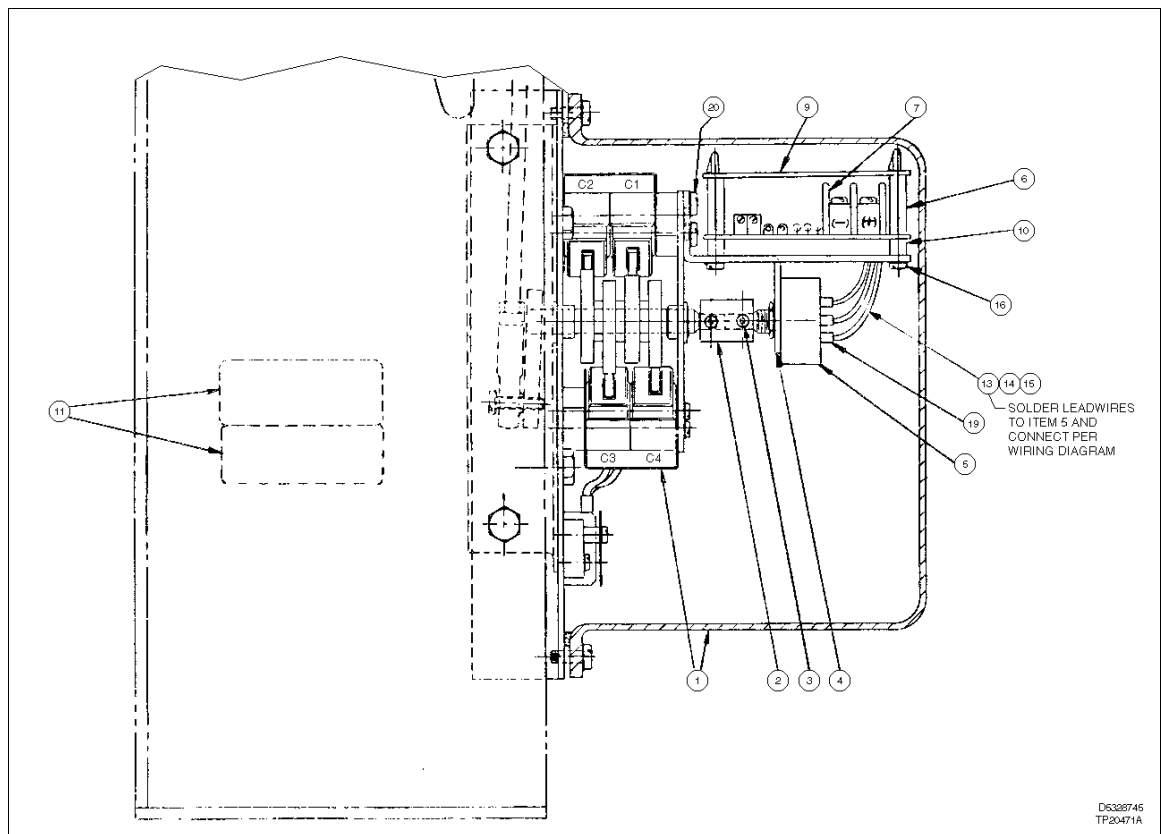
UP1 Electric Shaft Position Transmitter Kit, Table A-6 (Sheet 1 of 2)
